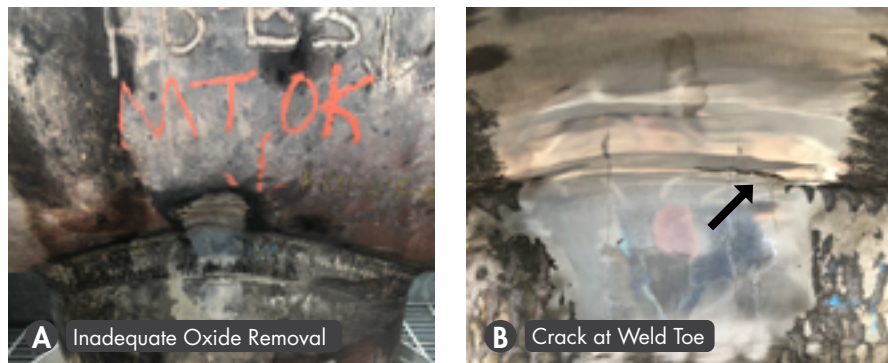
Example of Inadequate Surface Prep Leading to an "MT OK" (A) Finding on a Cracked Saddle Weld; the image in (B) is a Close View of the Crack Location (Note that the MT Inspection was Not Performed by Structural Integrity)
